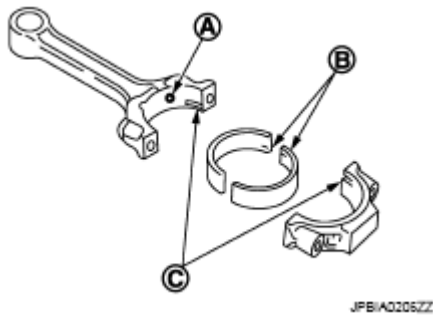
Aligning Connecting Rod Bearing Stopper Protrusion
